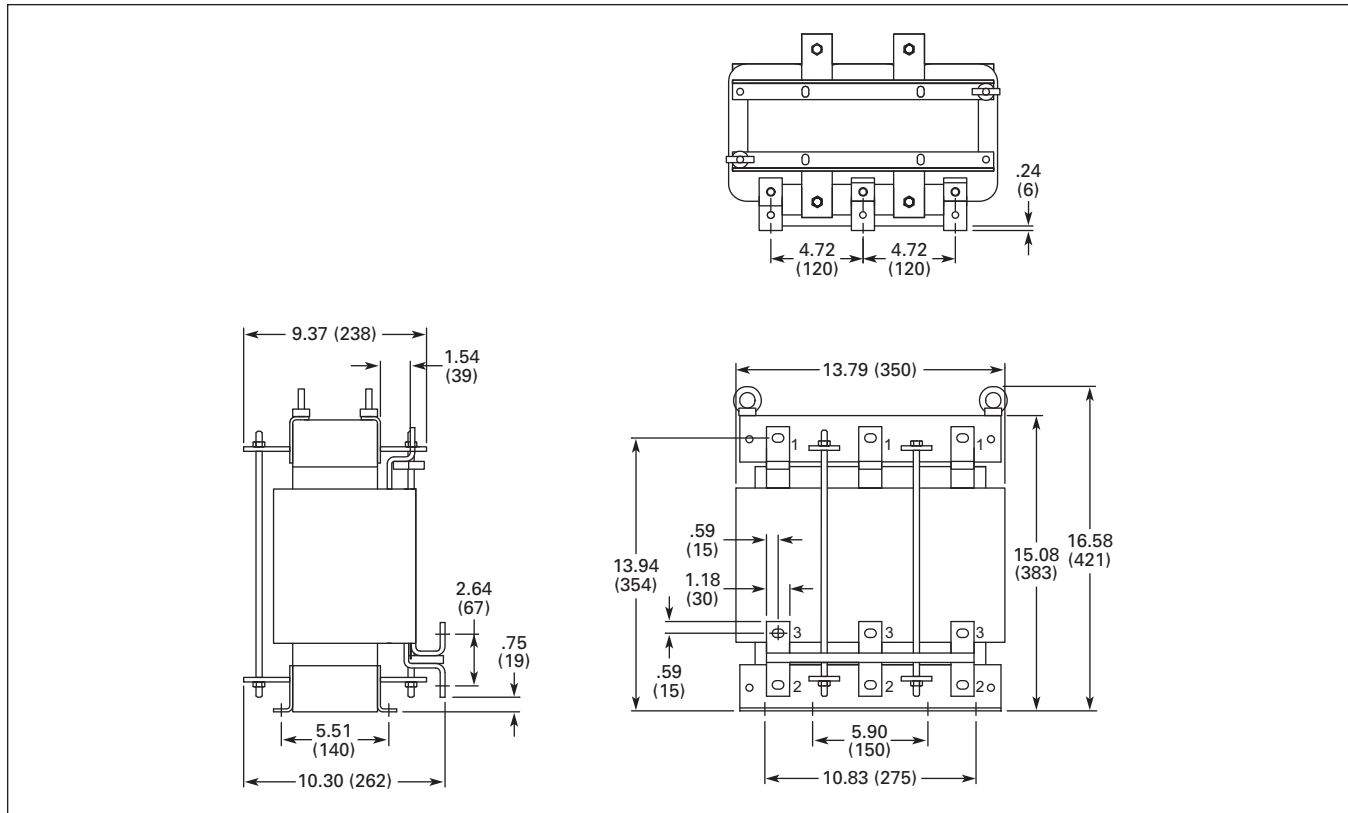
Dimensions of AC Choke CHK0400 in Inches (mm)
